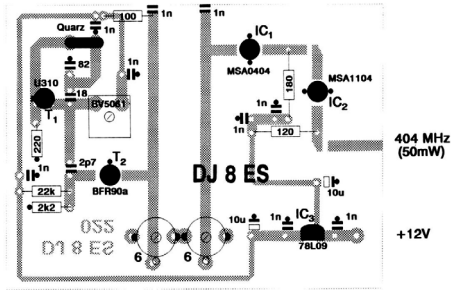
Component layout of the local oscillator used on the 70cm transverter showing the component side of the PCB.
